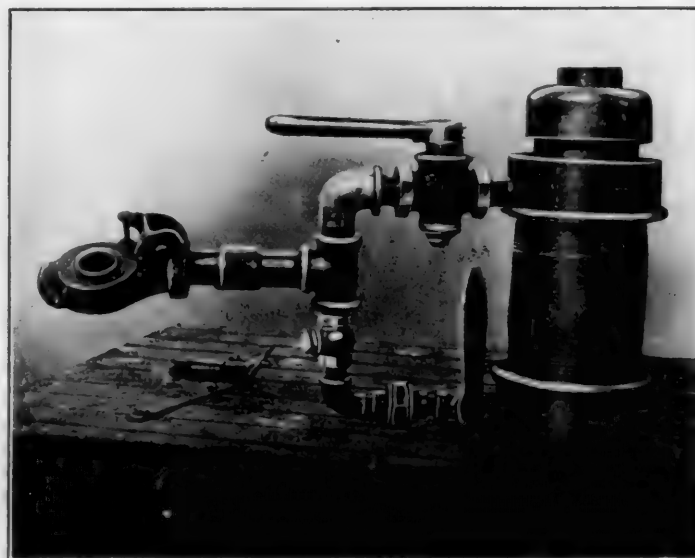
PNEUMATIC HAMMER FOR REMOVING FRAME BOLTS.
